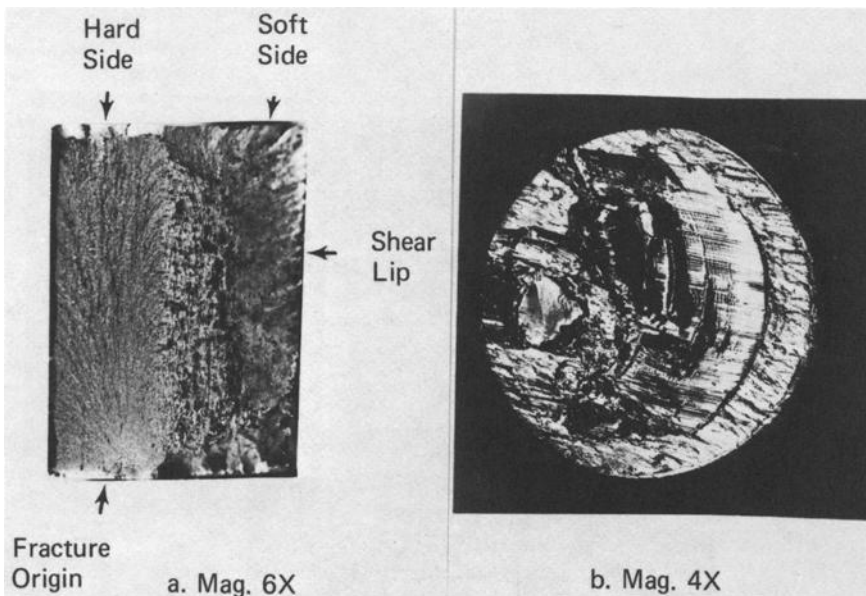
Fracture surface of (a) tension specimen and (b) shear specimen, both air melted material. Note fracture origin on hard side and presence of shear lip on soft side in (a).
